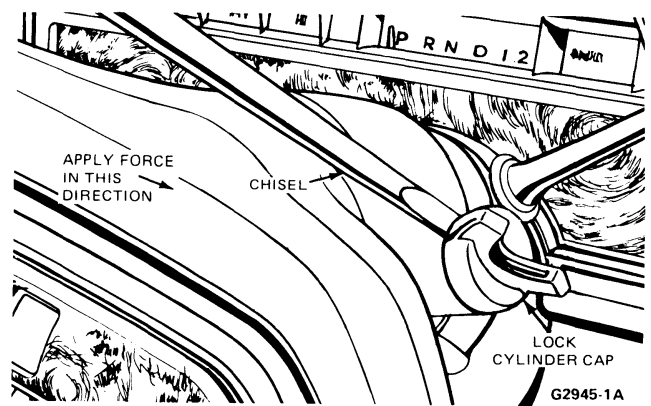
Breaking The Cap Away From The Lock Cylinder
